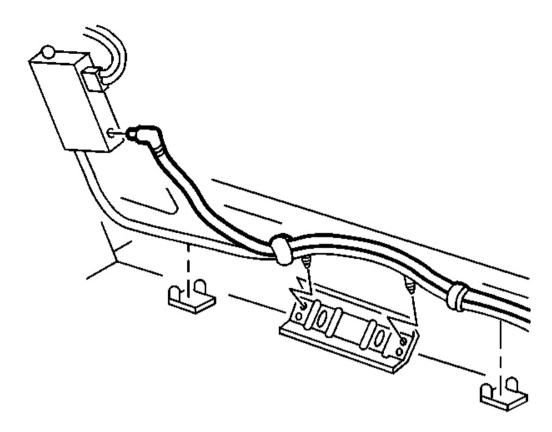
Radio Control Coaxial Cable At Antenna Module Courtesy of GENERAL MOTORS CORP.
